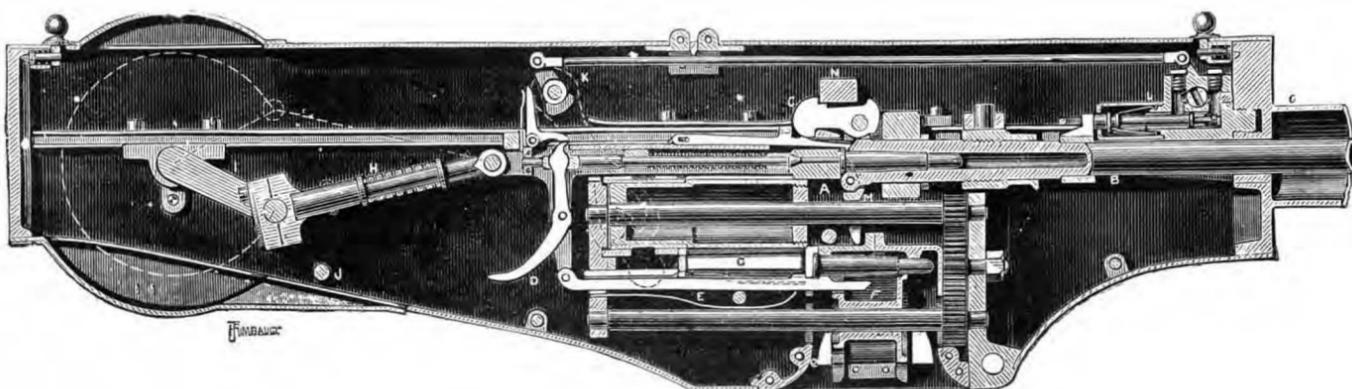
THE MAXIM SELF-ACTING MACHINE GUN.
